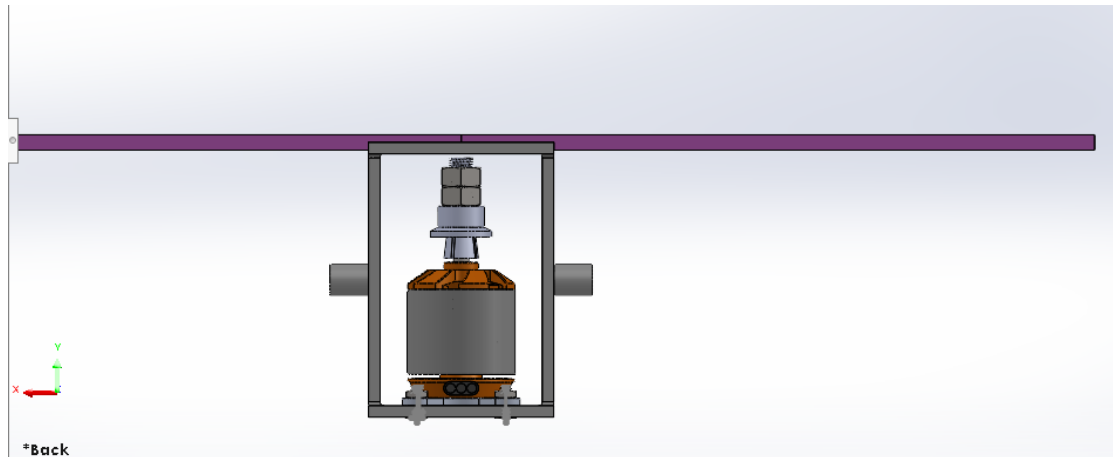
The cage, motor, and wheel assembly in SolidWorks. Showing the Back of the assembly. Motor model adapted from [126].
